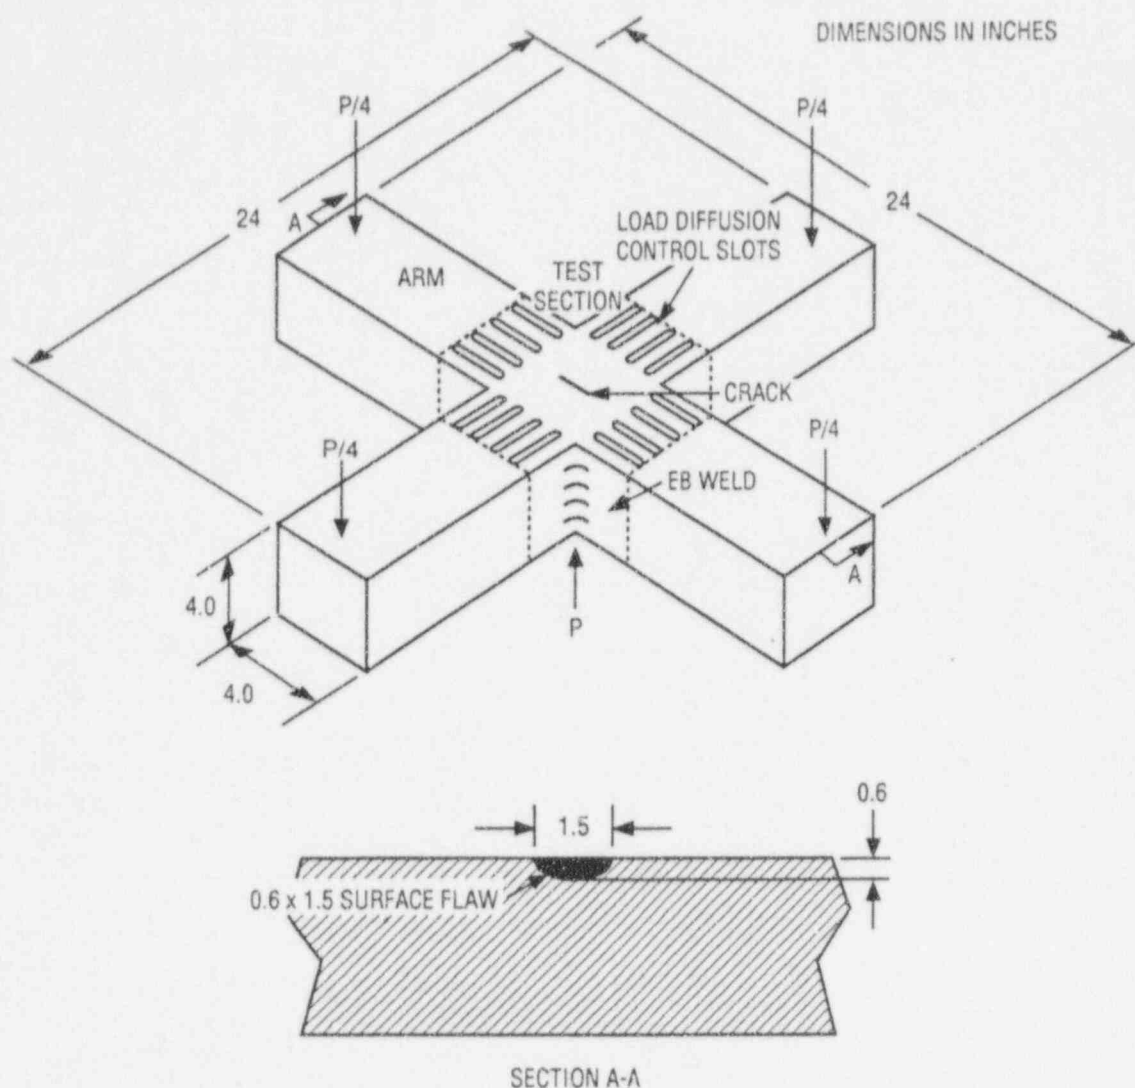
Schematic of finite-length flaw specimen showing dimensions, load points, and flaw geometry used in analyses
